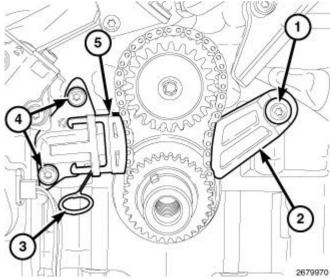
Primary Chain Tensioner, Tensioner Pin, Primary Chain Guide & Bolts Courtesy of CHRYSLER GROUP, LLC
